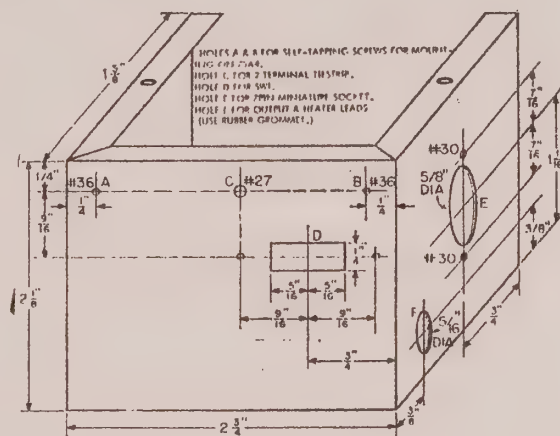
Location and dimensions of holes for the construction of the IFNL.
